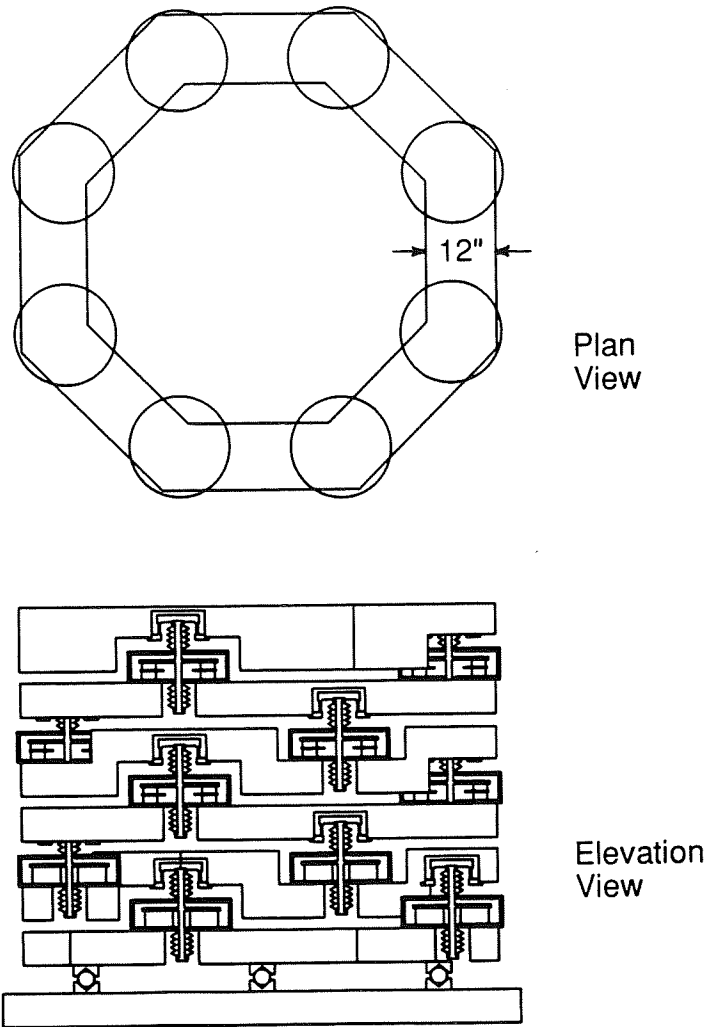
Five-stage isolation stack for test masses. Isolation between steel layers is provided by cylindrical modules consisting of elastomer elements encapsulated in vacuum-tight canisters with compliant bellows. *Upper:* Plan view of stack, with octagonal steel layers and cylindrical modules. *Lower:* Elevation view, showing offsets of modules and steel layers. The elastomer elements are represented by the rectangles under the horizontal plate in each canister. (The vertical rod, connected to this plate and to the bellows, is not connected to the canister.) The double bellows arrangement on each module provides compensation for forces when the gas pressure changes during pumping or venting.
